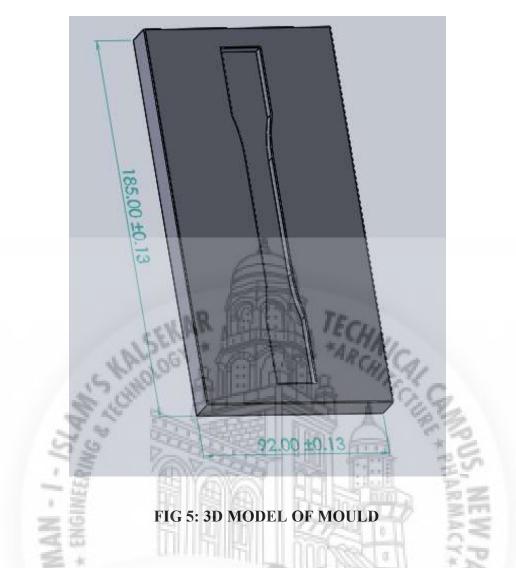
shows the 3d model of mould. Mould size is 185x92x14 mm. The material of mould is carbon steel.
